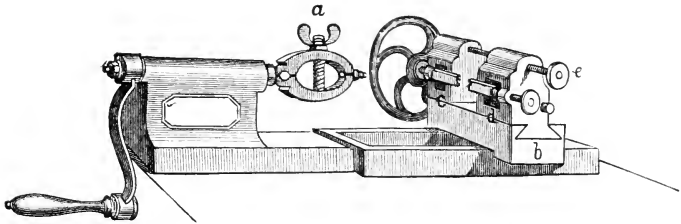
Screw-cutting machine. *a*, claws for grasping screw; *b*, slides for adjusting the cutting parts of die, *c* and *d*; *e*, set screw for determining the thickness of the finished shank.
